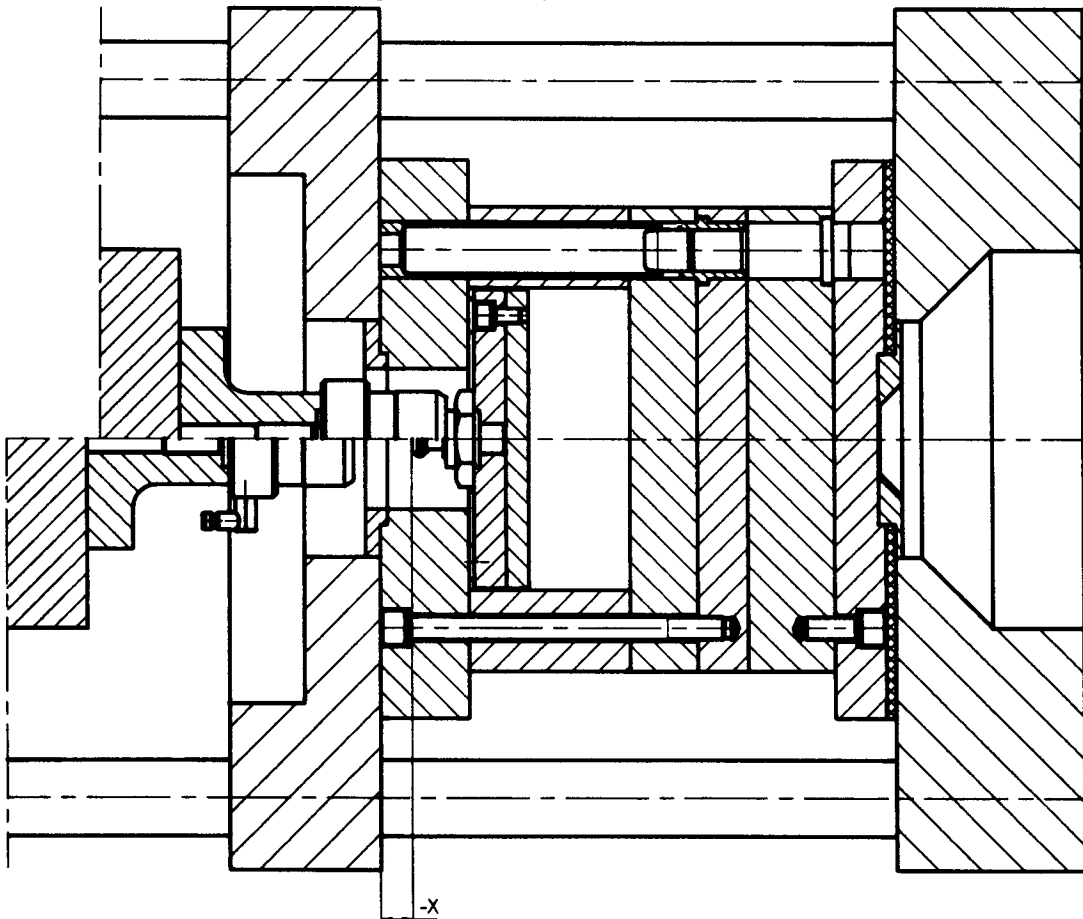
Type of installation C (no projecting coupling pin on the mould side)
